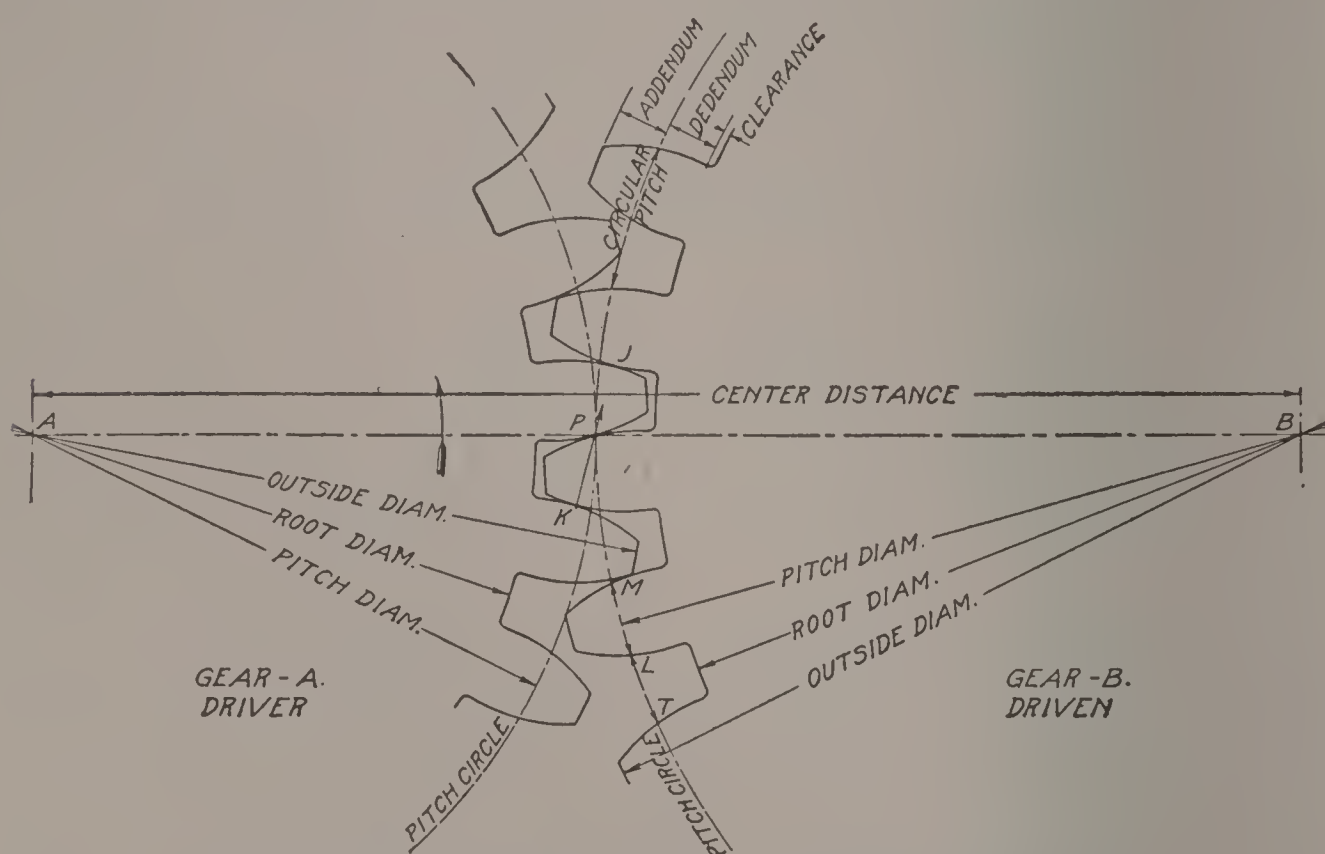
Layout for Pair of Gears, Showing Construction Features
